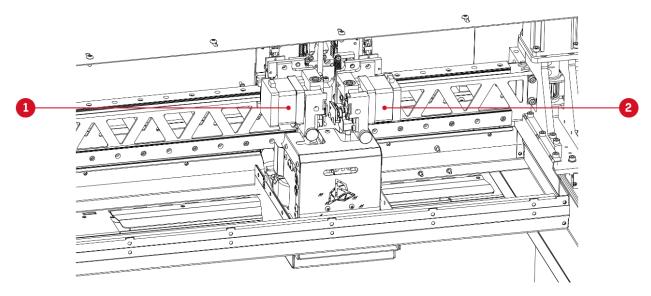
Arrangement of extruders: 1. Extruder T0 | 2. Extruder T1
